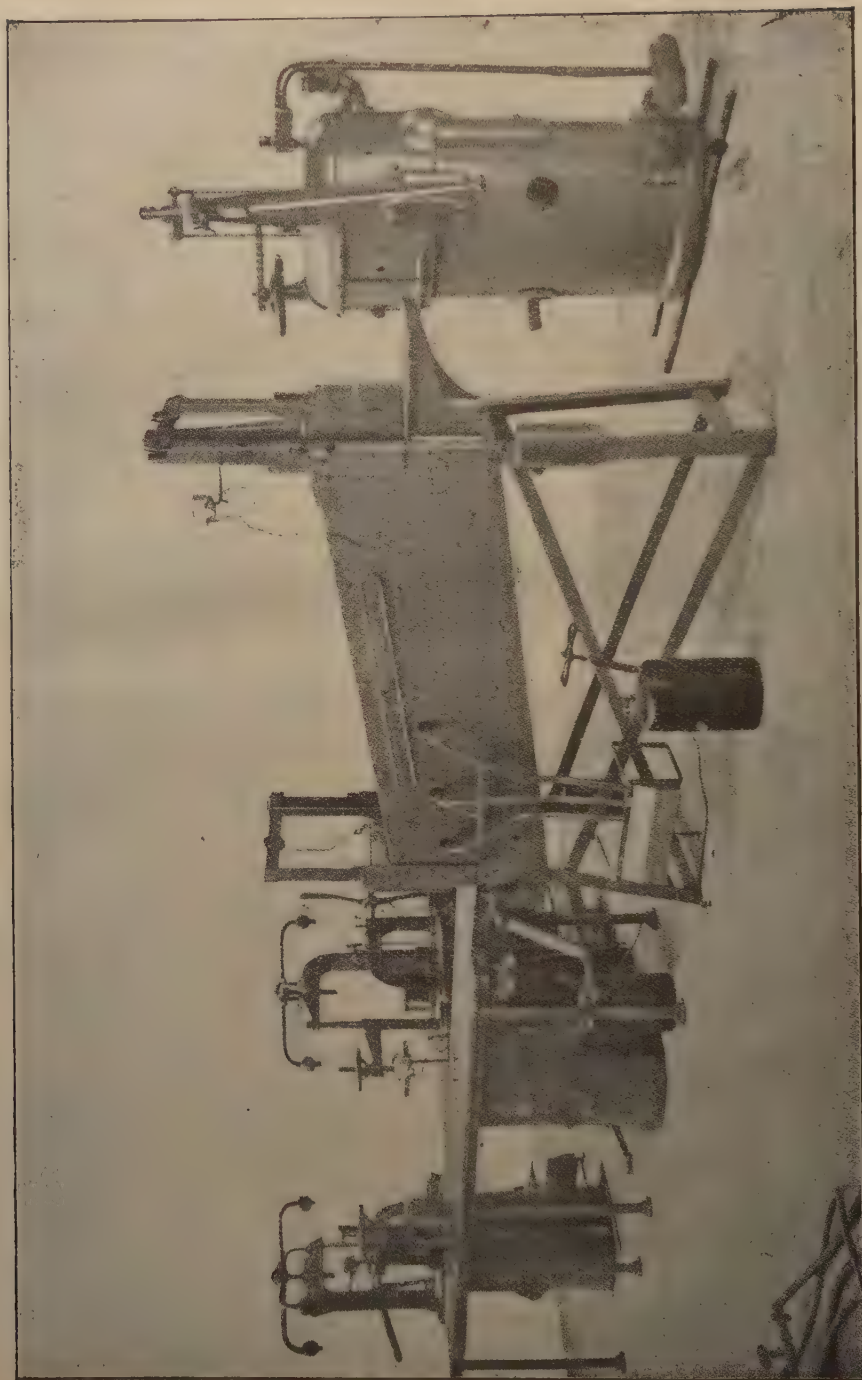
General view, showing furnaces, work table, and die-casting presses.
